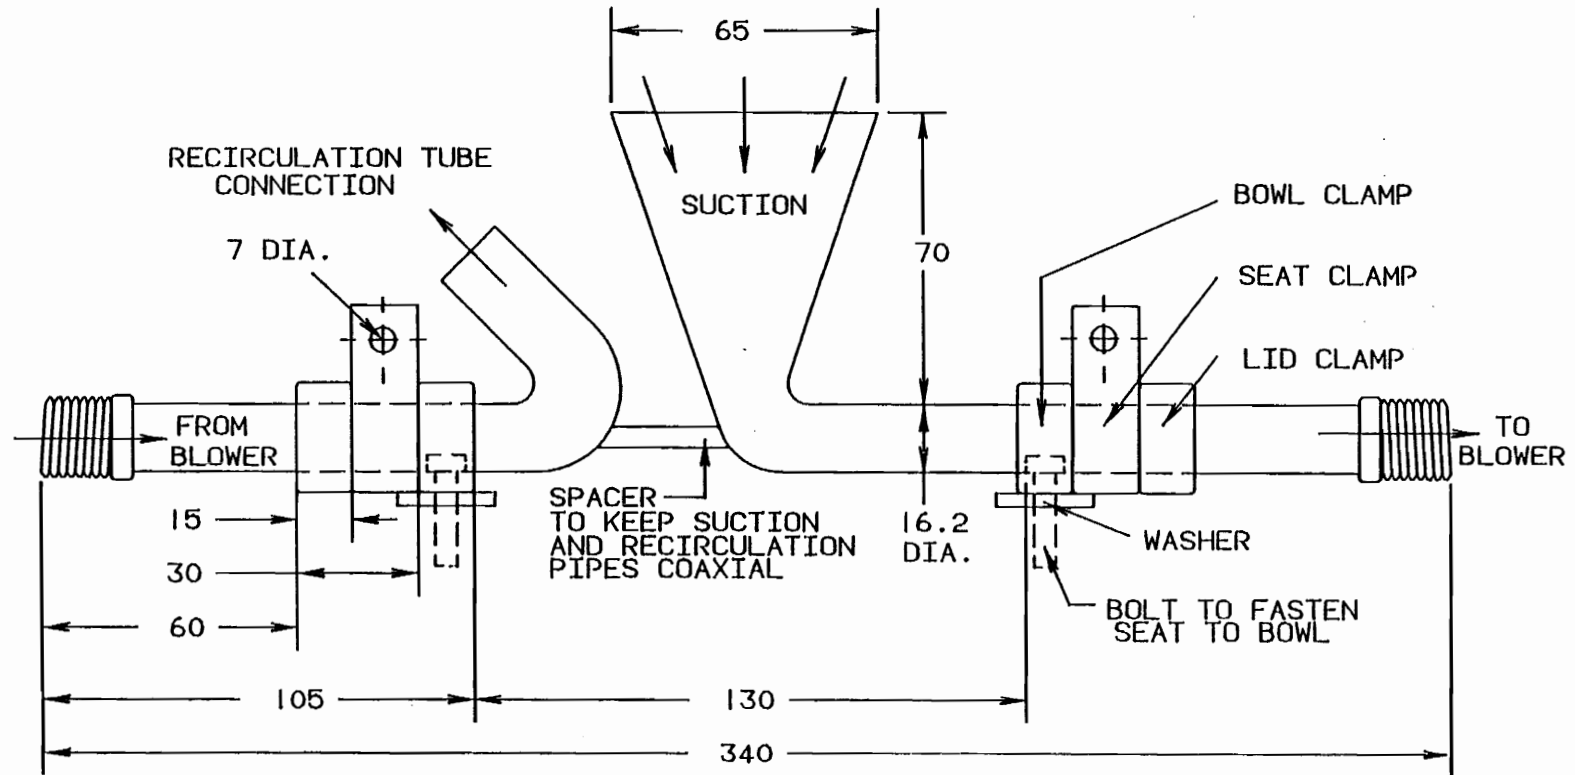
Hinge at Rear of Commode ALL DIMENSIONS ARE IN MILLIMETERS
